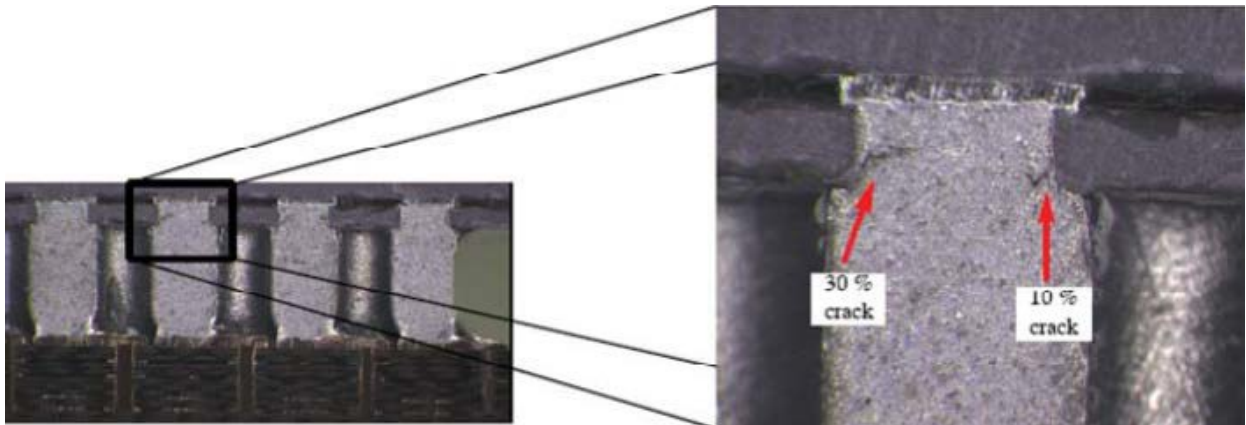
Sample after Qualification sample testing: Microsection of CGA mounted on PCB showing crack in the solder fillet
